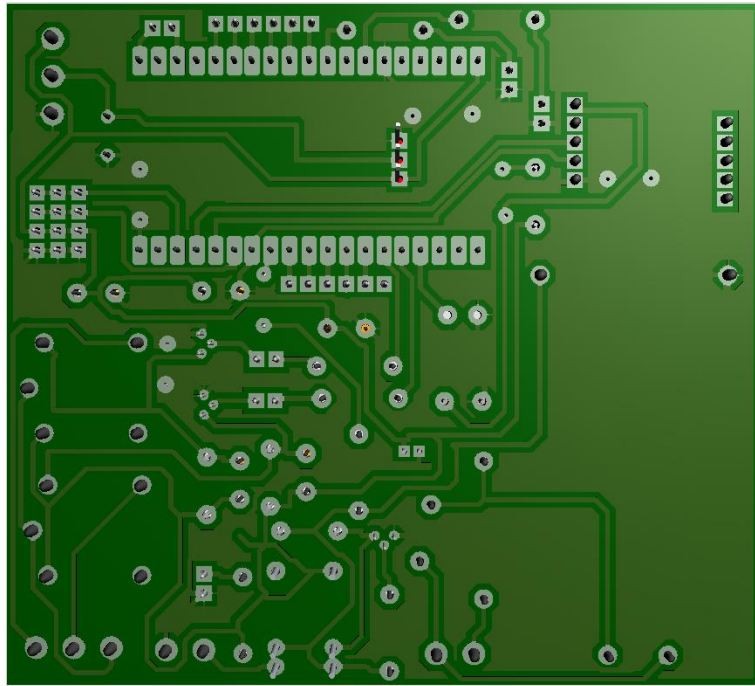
Pinout configuration of the electronic devices before etching process of control PCB circuit
